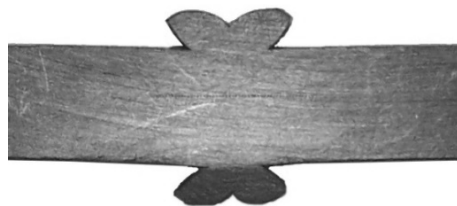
Shape of a butt weld corresponding to optimal welding conditions (pipe $D = 110$, $s = 6.3$, SDR 17.6)
